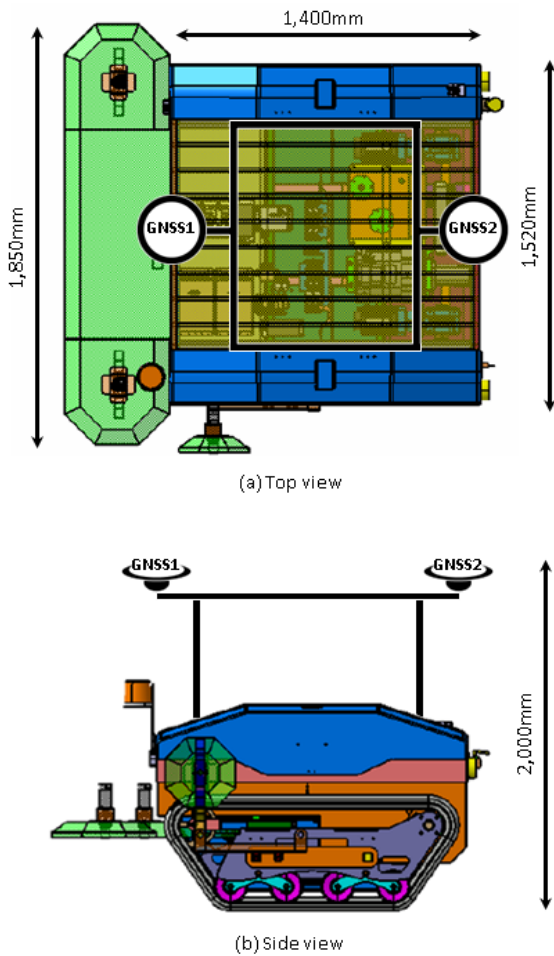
Schematic of GNSS module installation top view (a), side view (b)
